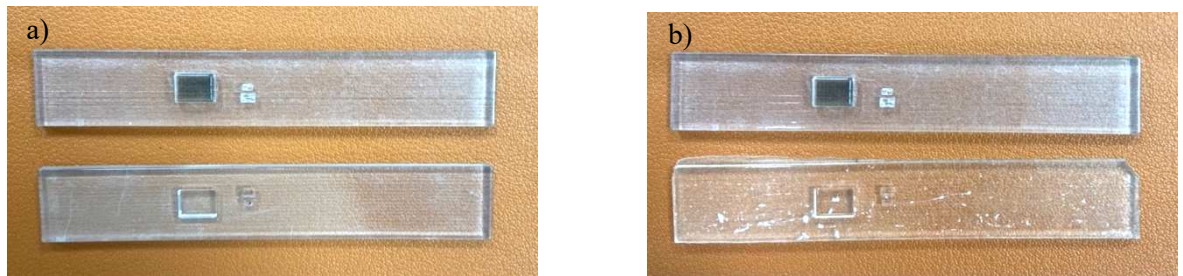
(a) blisters or tiny bubbles on Platilon U 4201 AU after heating with heat gun at 240°C (b) wire is cut due to the pressure created between the table and the window
